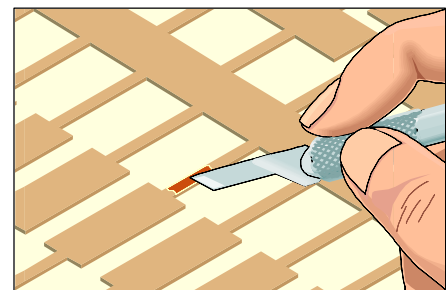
Scrape off the adhesive bonding film from the solder joint area on the back of new pad.
